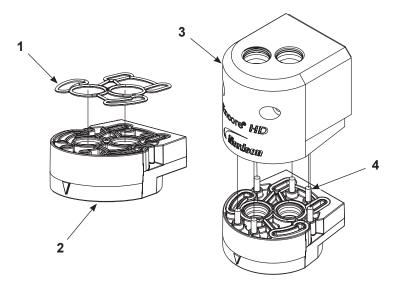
Assemble Lower Y Block to Purge Manifold
